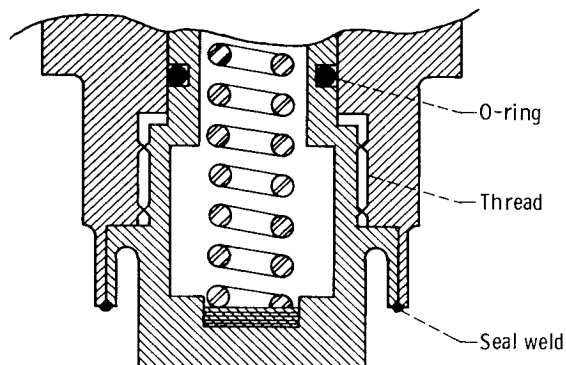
Sketch of seal-welded joint in a diaphragm actuator.
